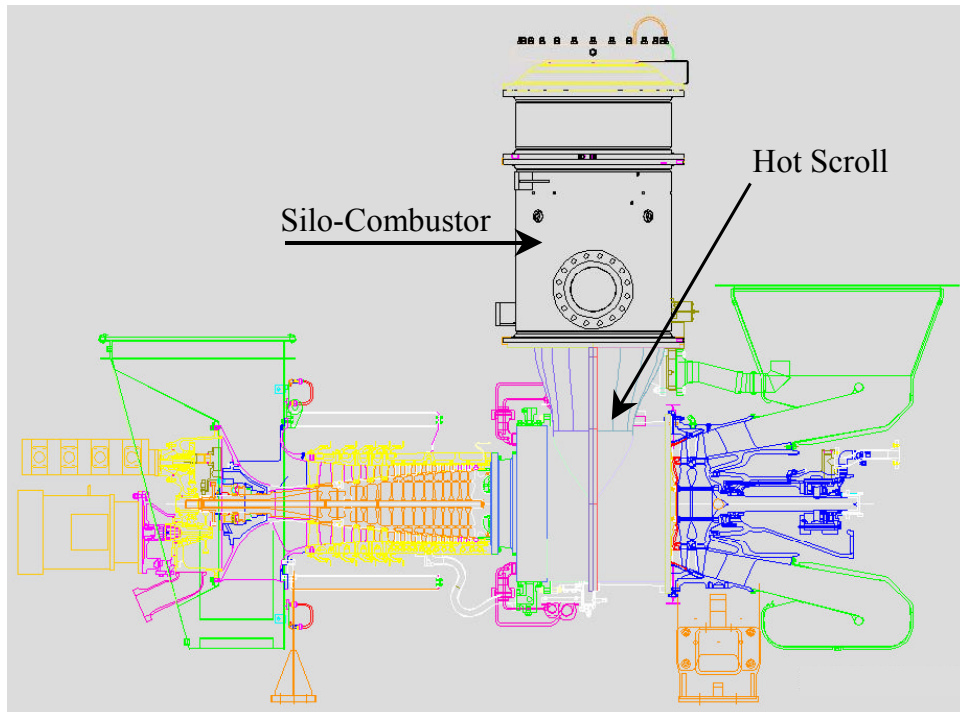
A Gas Turbine with a Silo-Combustor and a Hot Scroll
